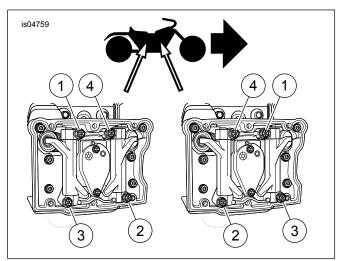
Tighten Four Rocker ARM Bolts 1/4 Turn in Sequence Shown
